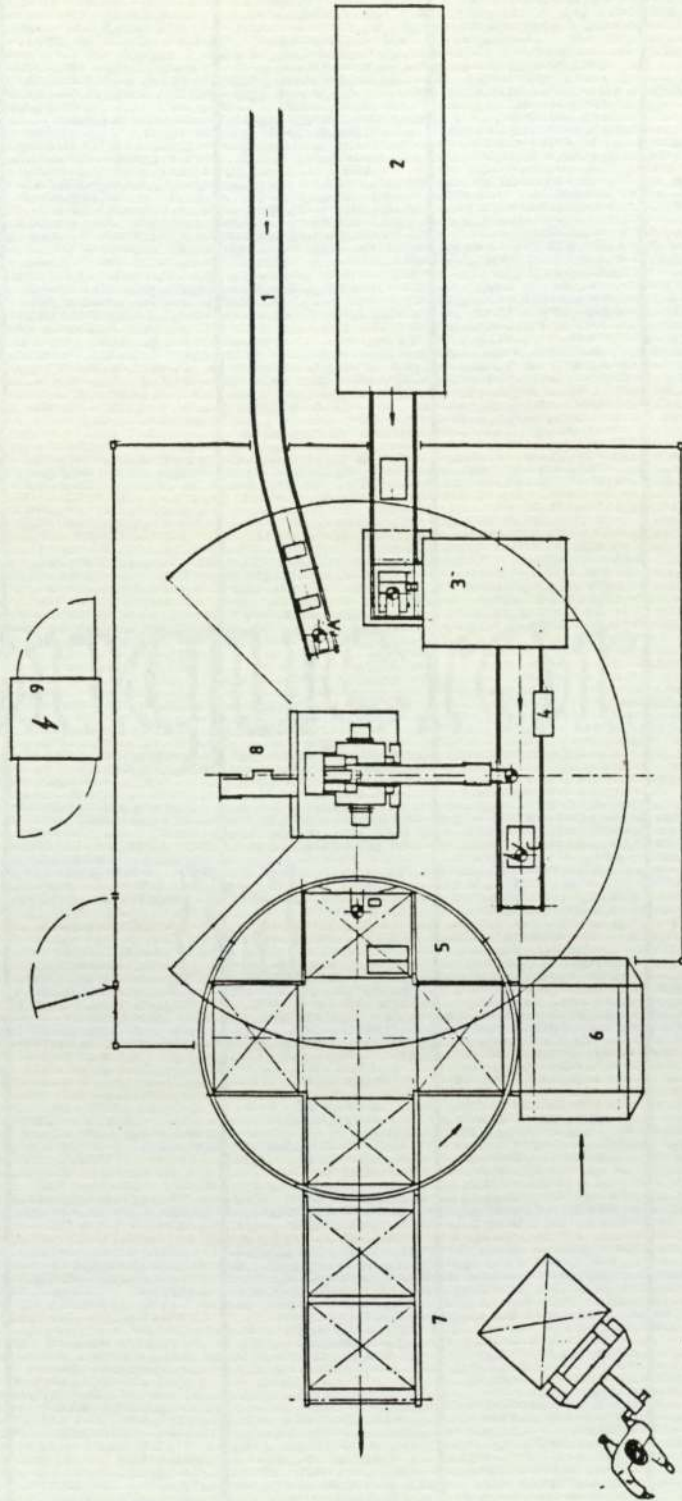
Robot Palletising System (plan view, scale 1:100)
